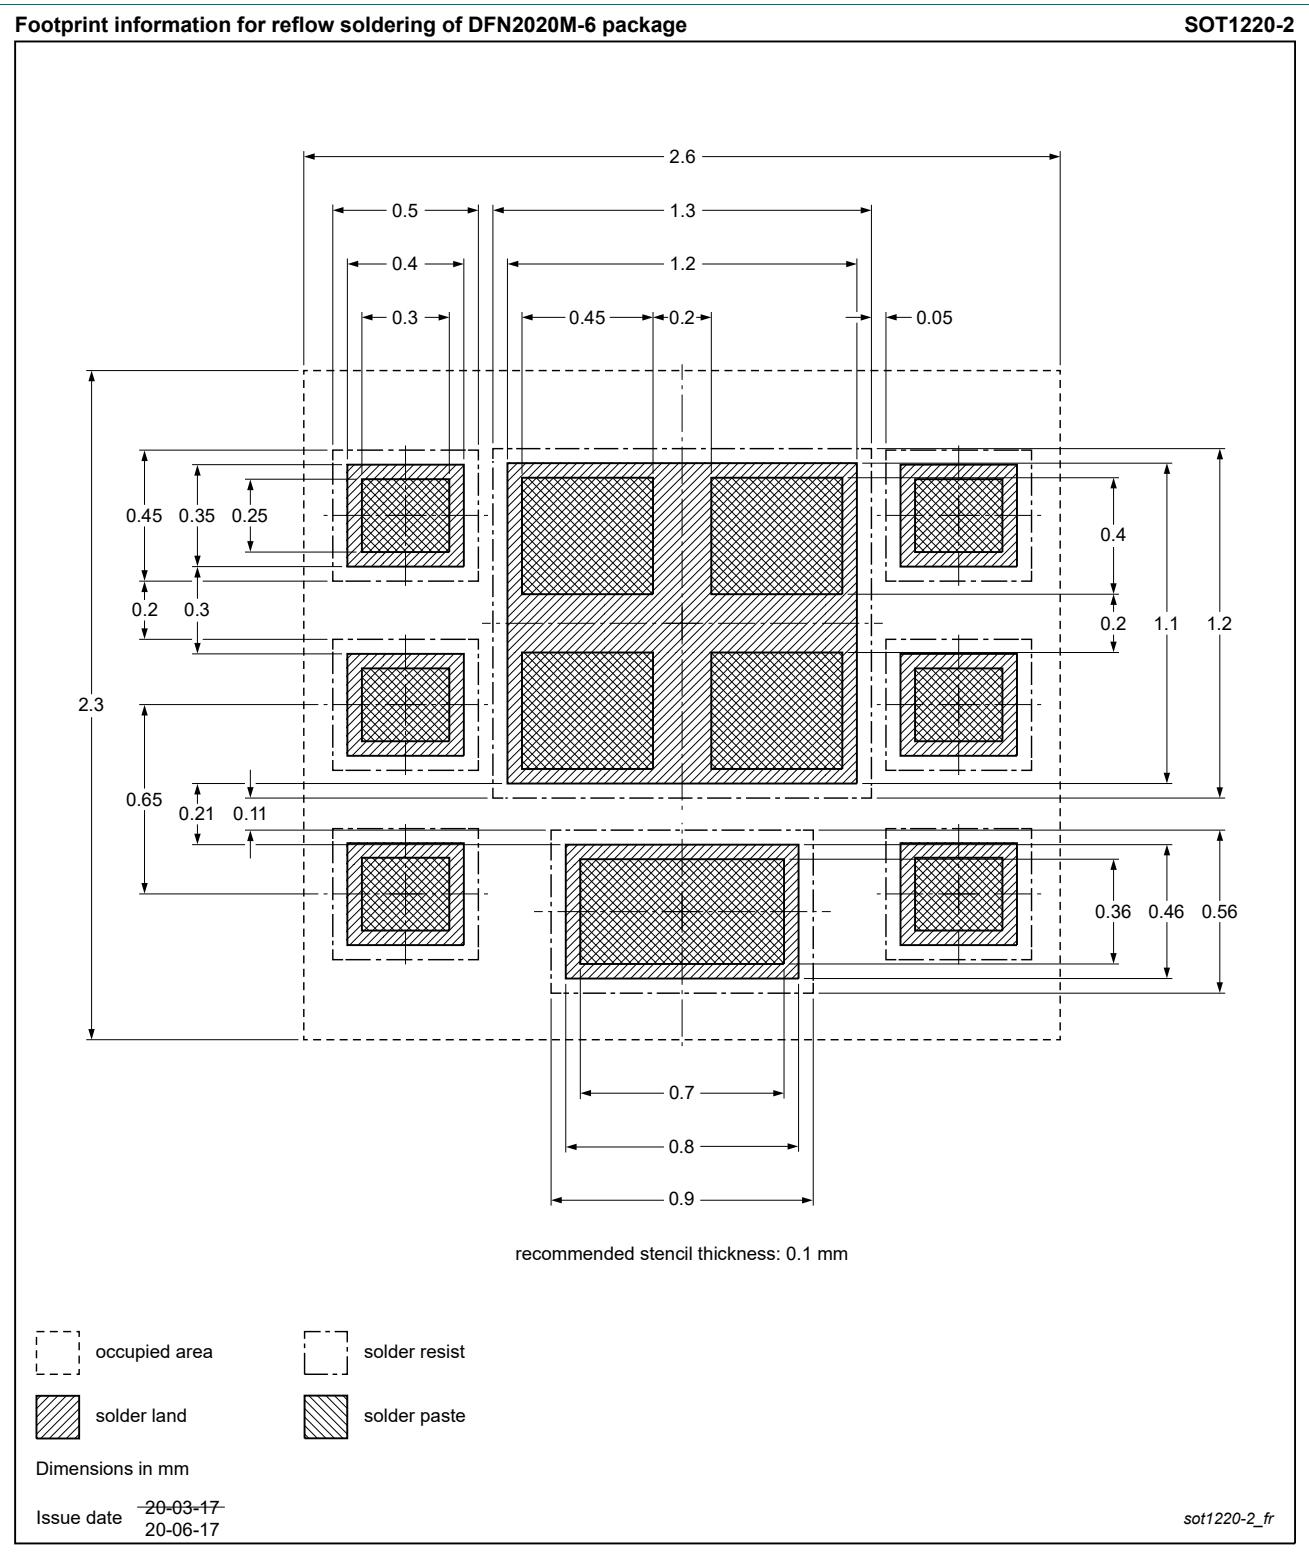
Reflow soldering footprint for DFN2020M-6 (SOT1220-2)
